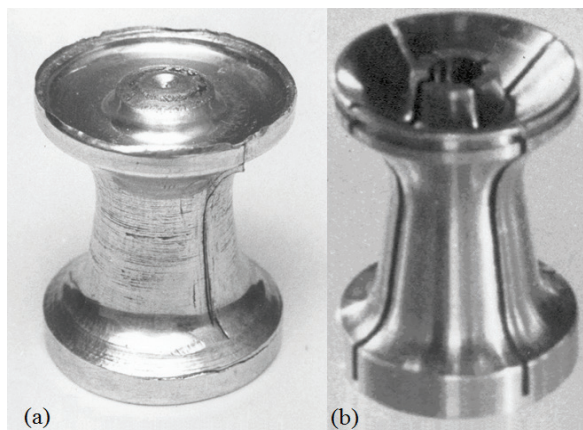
Axisymmetric part with end thickenings; a) before, and b) after machining
